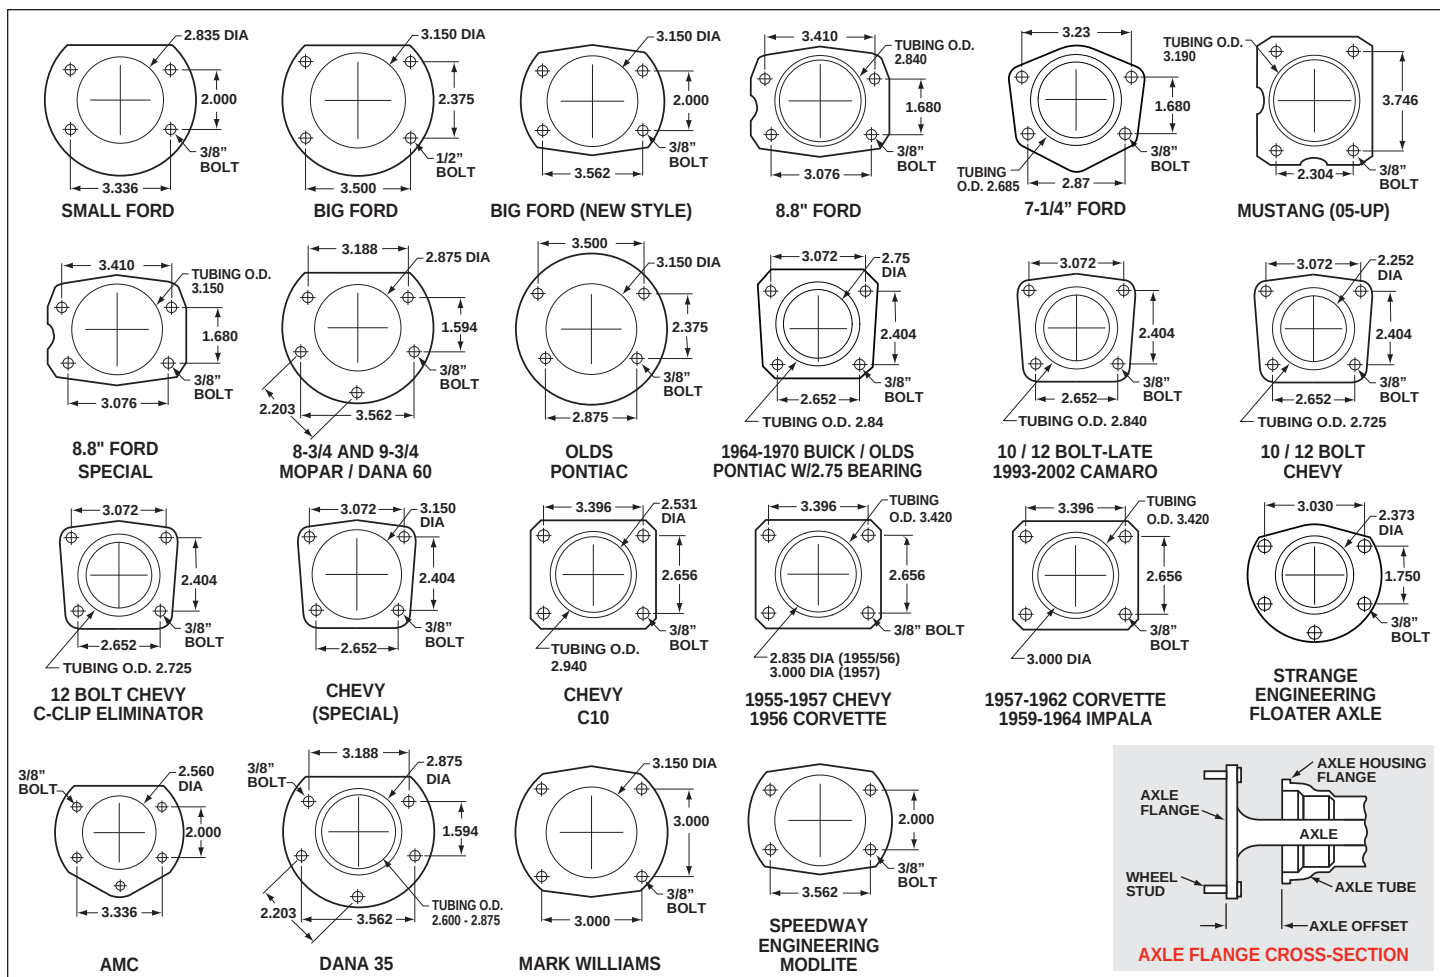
Rear Housing Flange Chart and Axle Flange / Offset Cross-Section
